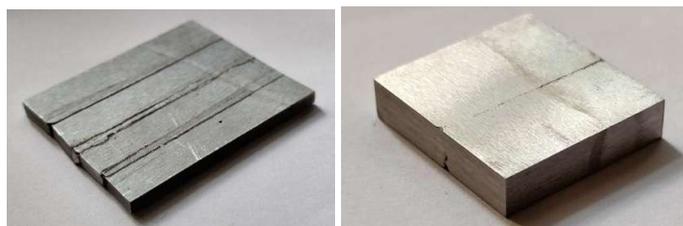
Laser welded part of (a) Cold rolled (b) Hot rolled
